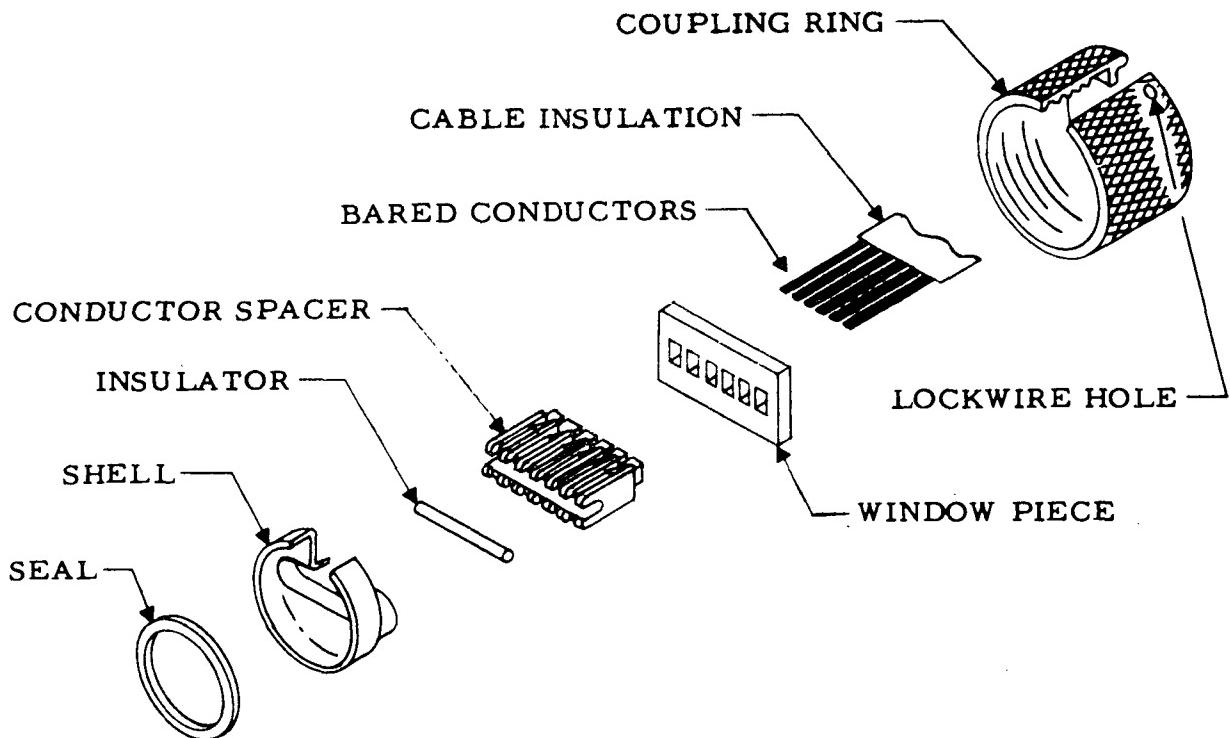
CYLINDRICAL PLUG PARTS
